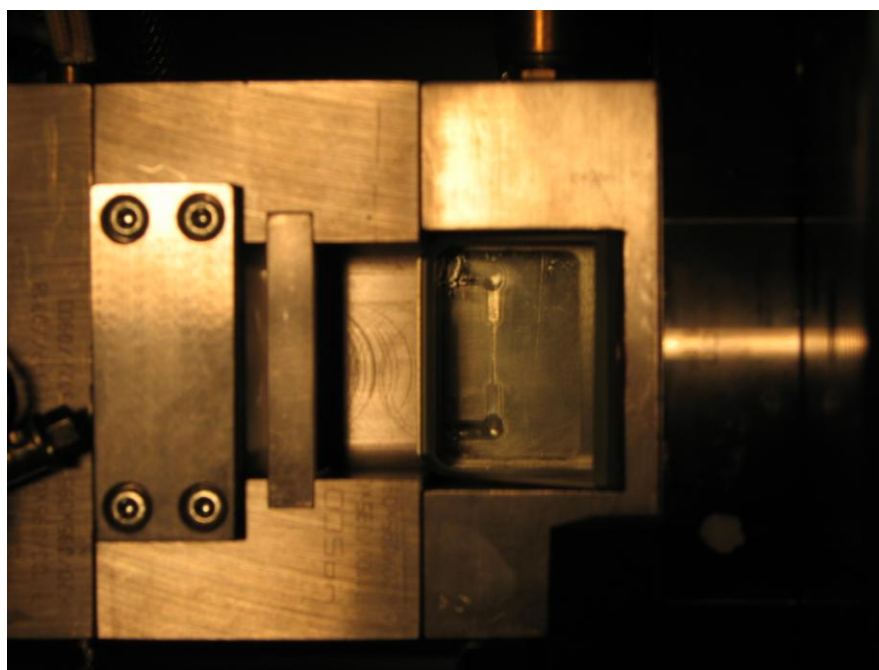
Glass insert mold, real appearance of stationary mold side
